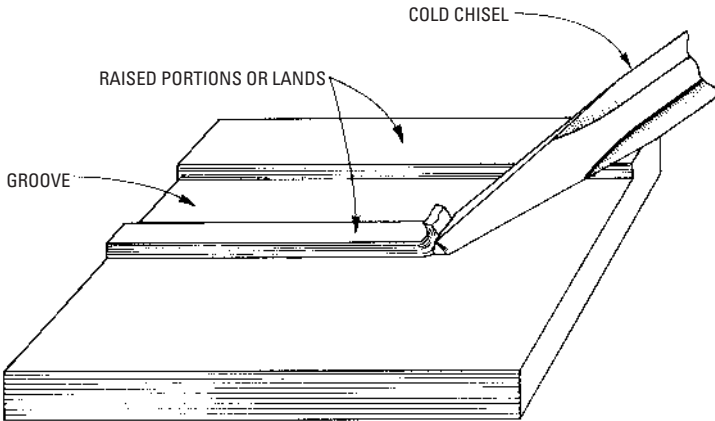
Using the cold chisel to remove *lands* in chipping a broad flat surface.
